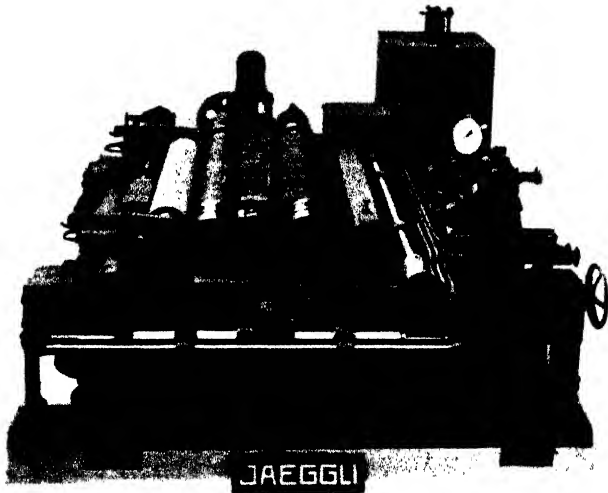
Jaeggli Machine, type MM3, in working position.
